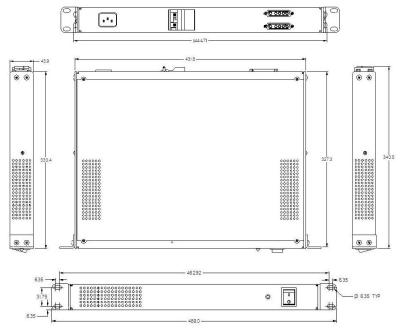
SCo750/SC1000/SC2000 Mechanical Dimensions
